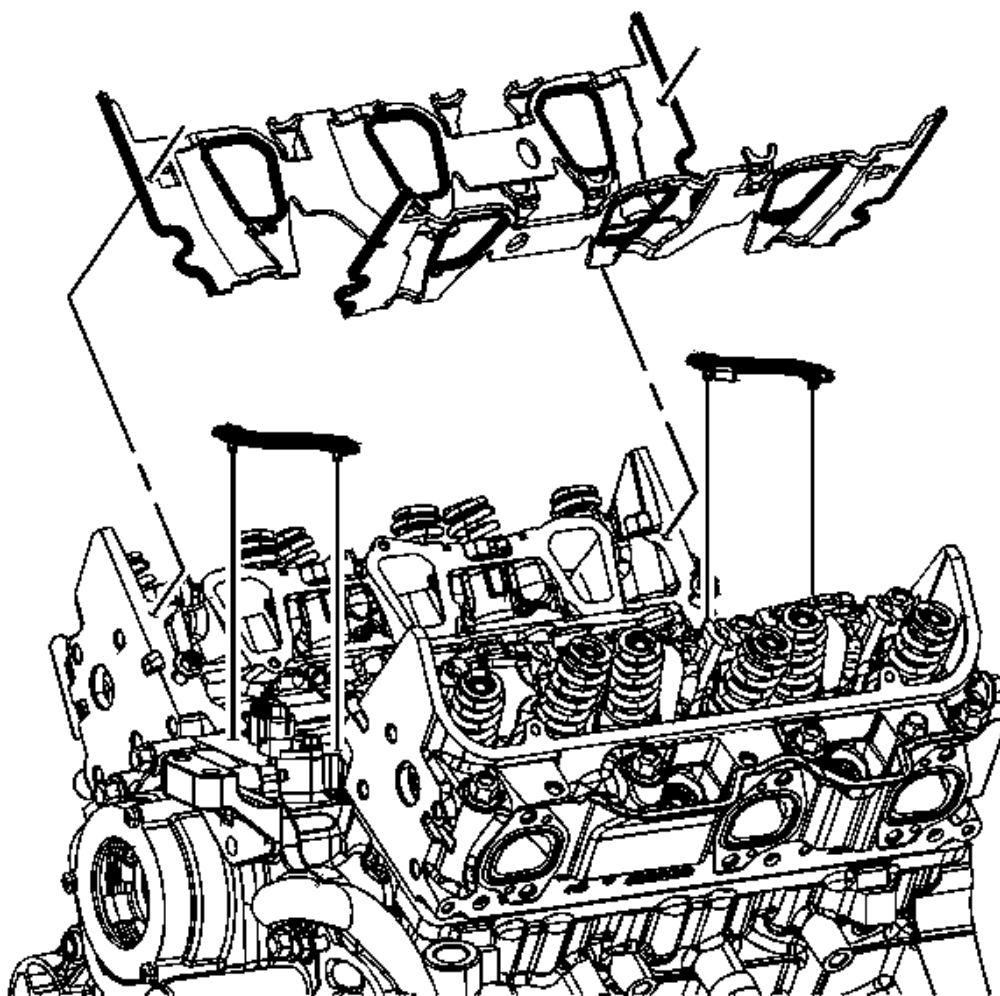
Identifying Intake Manifold Gaskets & Seals
